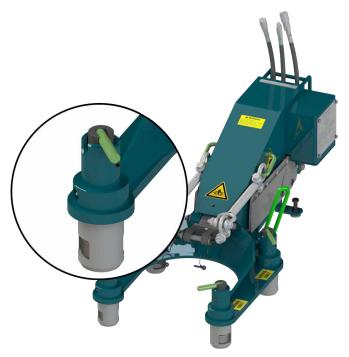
Slip Lifter Locking Assembly (P/N89208)
